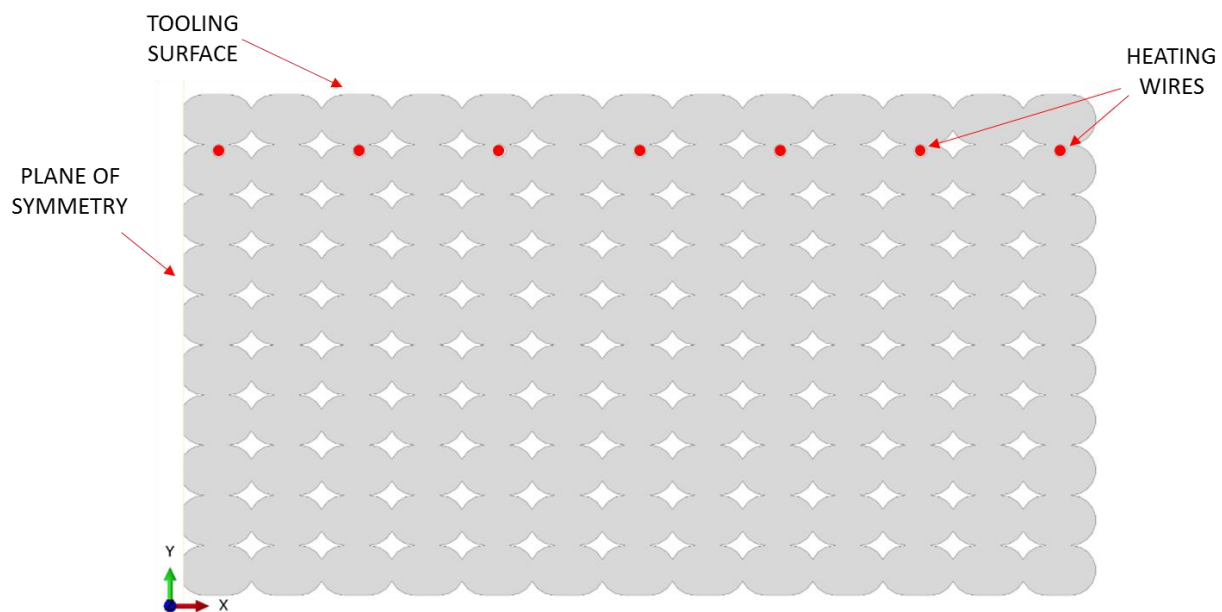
Cross-sectional view of printed tool equipped with heating circuit.
